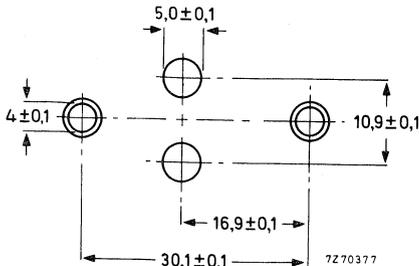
Hole pattern for 500 V insulation, nut fastening.
